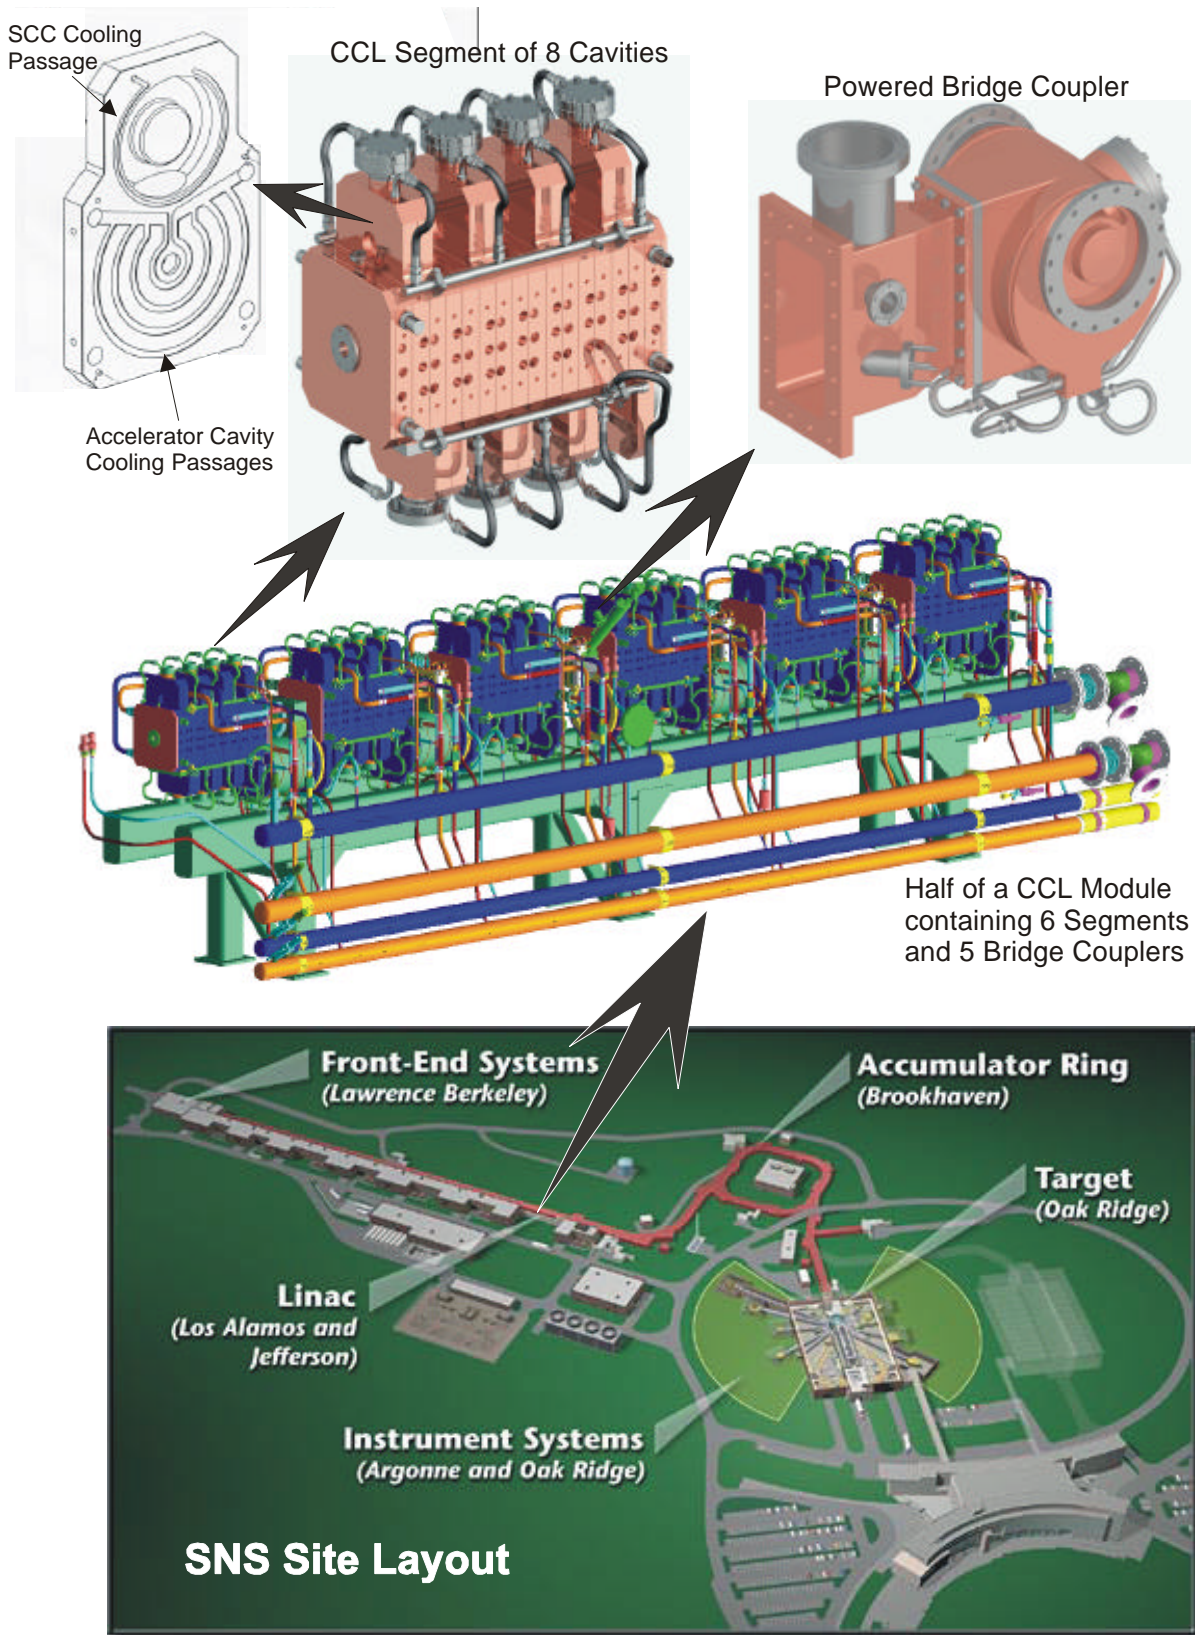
Schematic layout of the SNS, with exploded views of half a CCL module and its major R F structure components.
